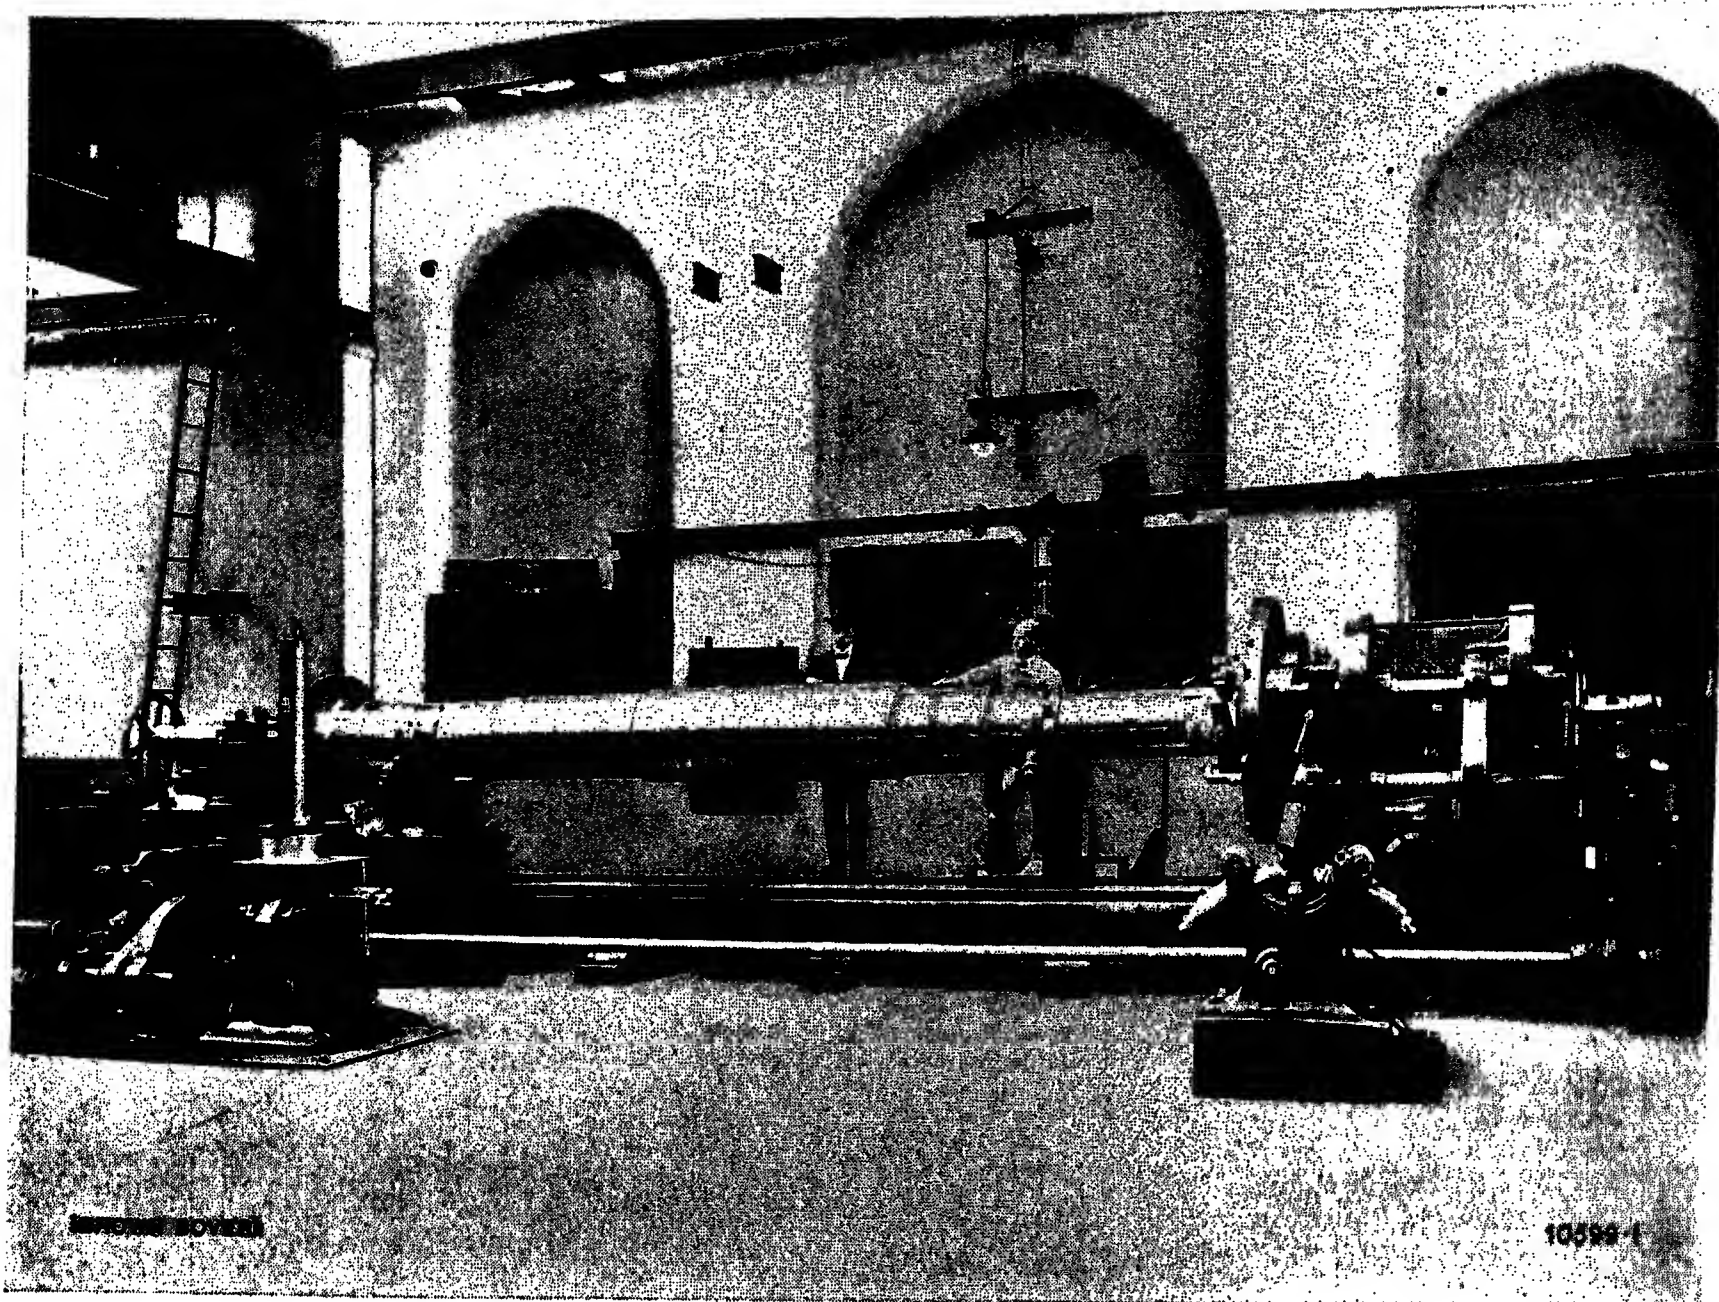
Finishing a heavy shaft for a single-phase alternator, 9000 kVA, 333 r. p. m.
